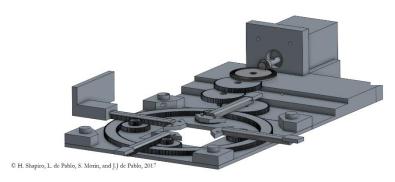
Isometric view of PolyStretch CAD design with baseplate hidden, showing alignment of the gears, rods, and axles I designed for this project.
